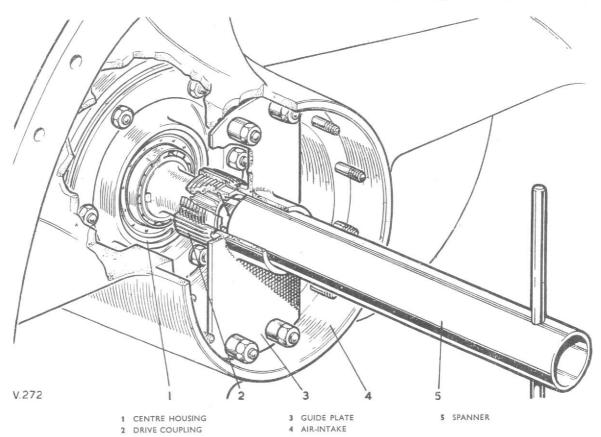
Tightening the drive coupling ring nut with locally made tube spanner
